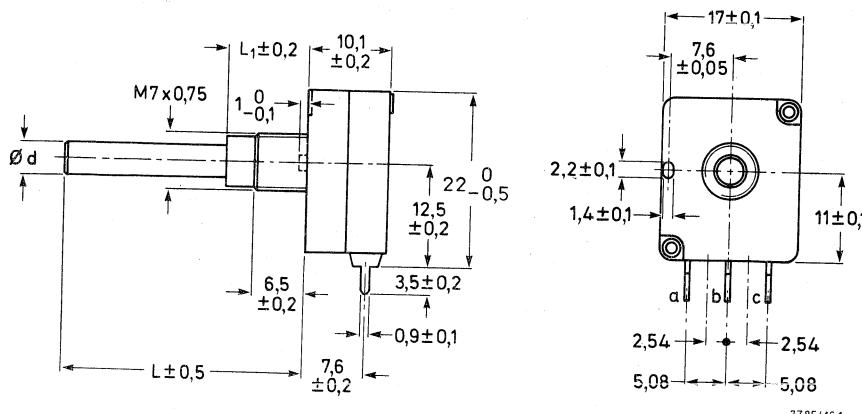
Single potentiometer with mounting bush M7 x 0,75 mm.
